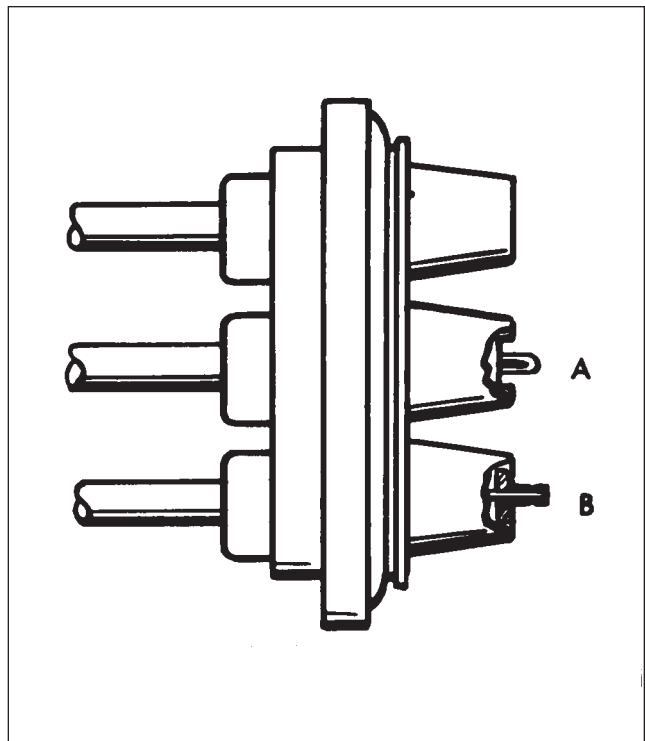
Wire Doubled Over for Installation of Eyelet
